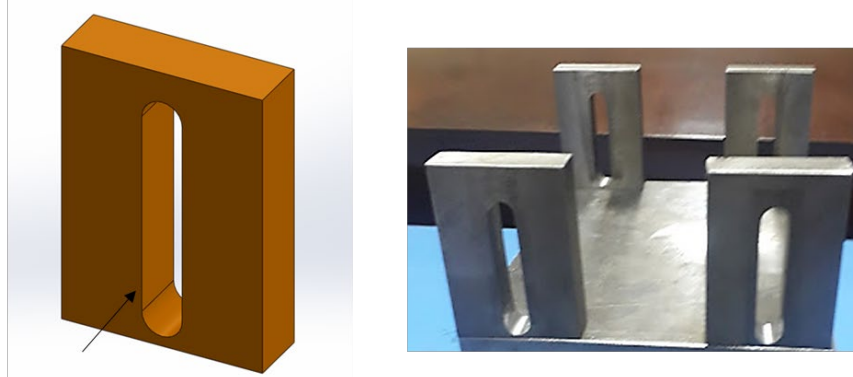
Individual parts and the v-locator sliding assembly (one assembly out of two identical assemblies)
